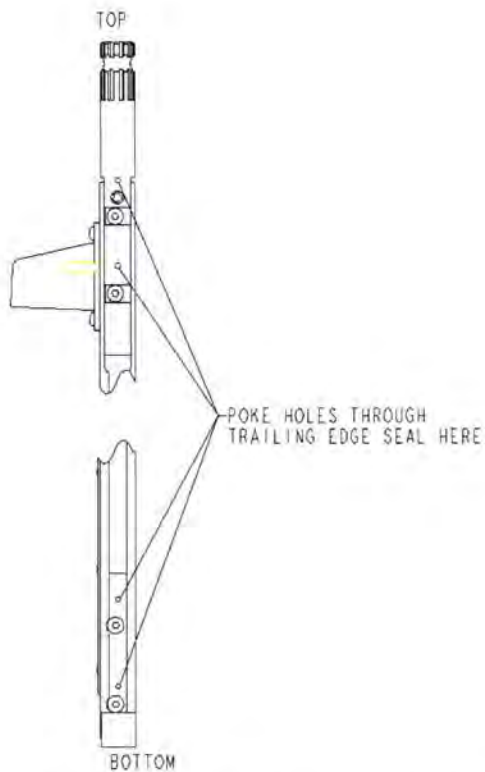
HAND DOOR PANEL TRAILING EDGE SEAL INSTALLATION
